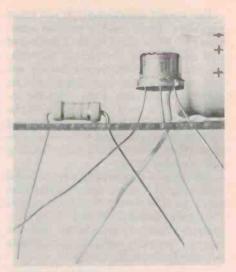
When mounting components to a printed circuit board, the leads may be splayed, before soldering, to hold them in position.
